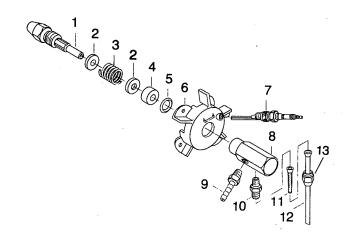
Replacement Parts Illustration for Burner Head Assembly Model F150E
